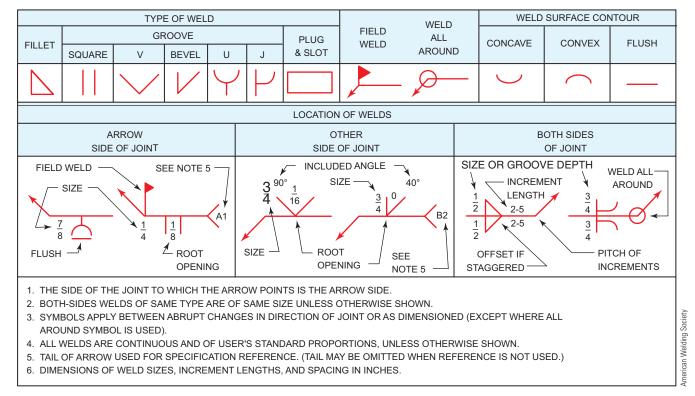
Welding symbols for different types of welds.
